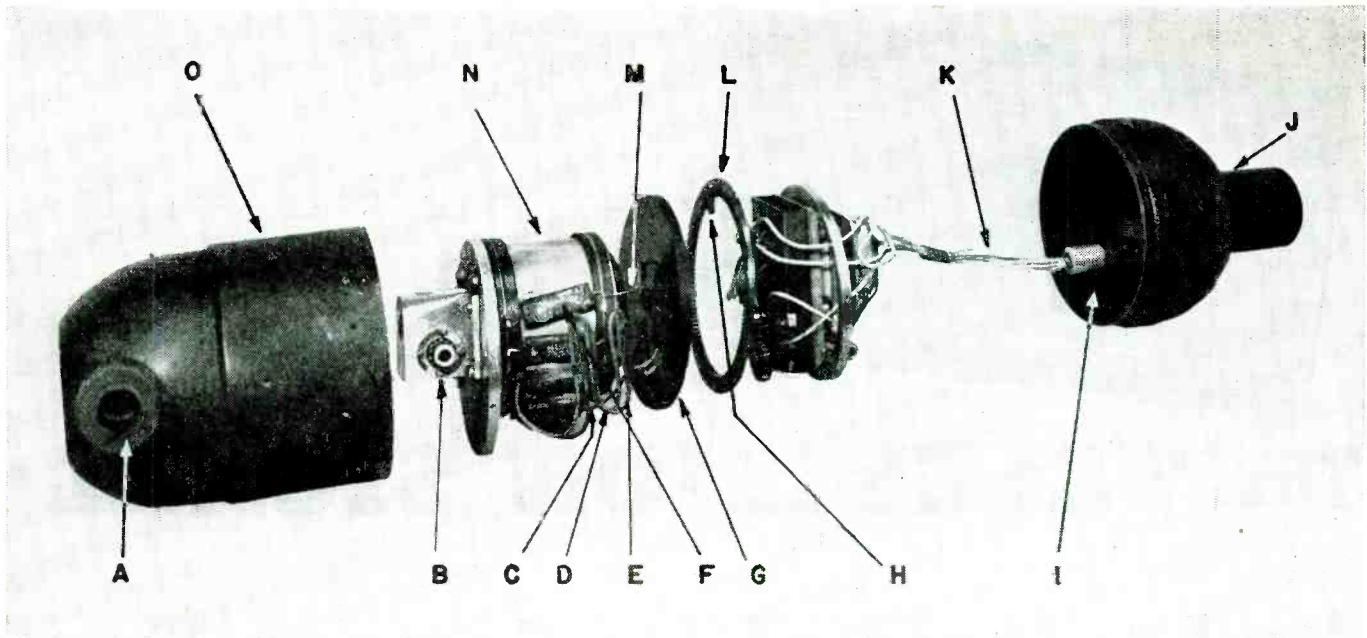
Remote control assembly. *A*, hole for antenna arms; *B*, gear box to drive extensible arm; *C*, common ground; *D*, retracting lead; *E*, extending lead; *F*, 10-mfd capacitor; *G*, insulating plate; *H*, automatic safety stop; *I*, plug to a 5-lead twinax cable; *J*, bottom motor housing; *K*, 5-lead cable (one common, two leads for clockwise and counter-clockwise rotation, and two leads for extending and retracting antenna arm); *L*, ring gear for rotation; *M*, extending lead; *N*, reversible motor for extending arms; *O*, top motor housing.
